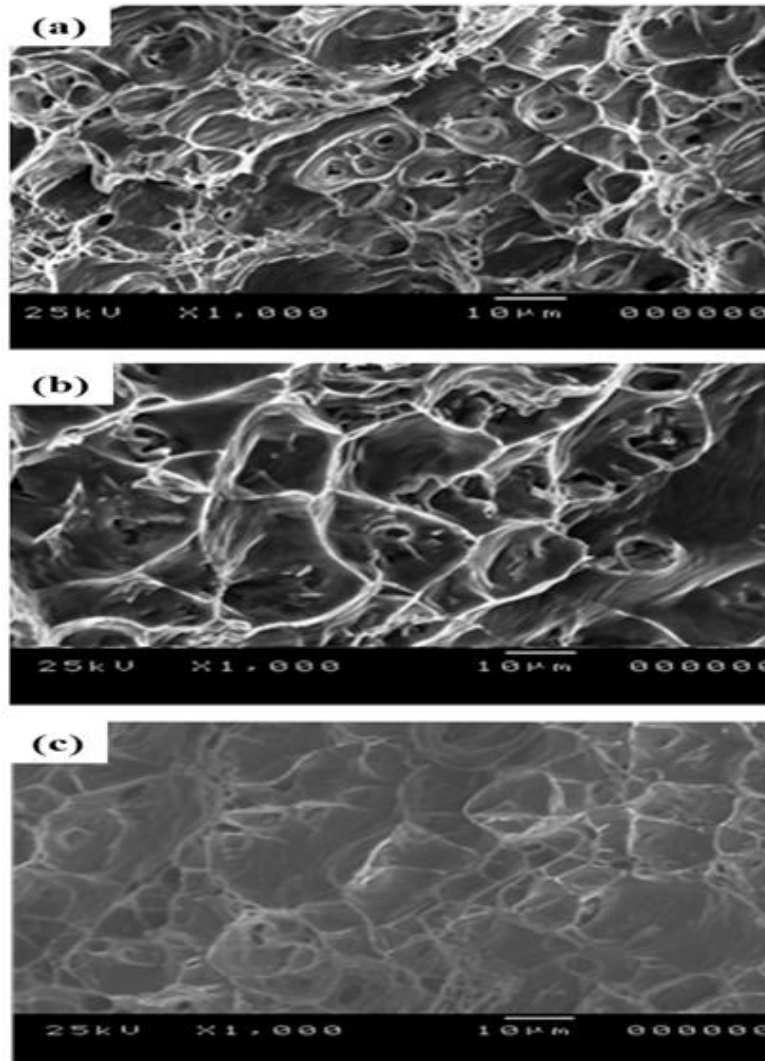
Microscopic tensile fracture surface of 6063 base metal.
